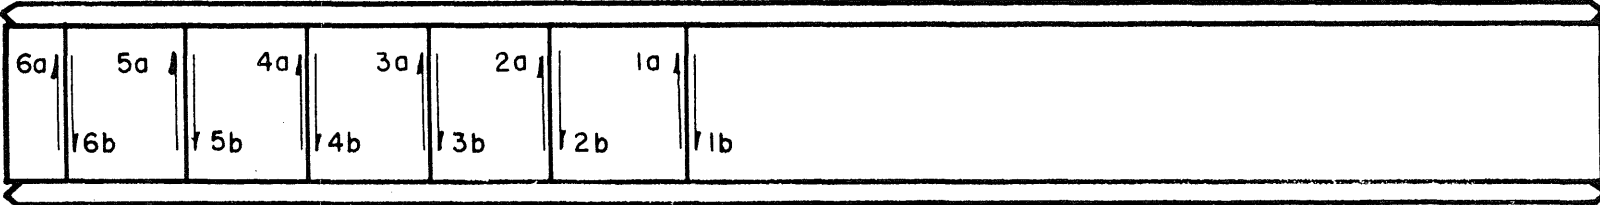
LOCATION OF STIFFENERS FOR WELDING SEQUENCE B
